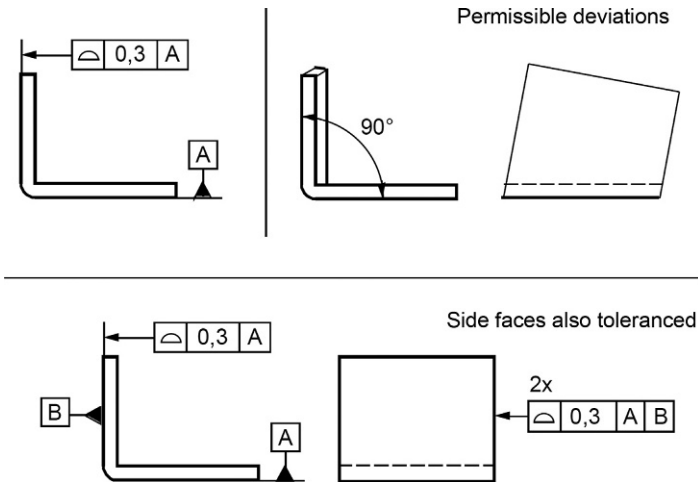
Tolerancing of perpendicularity of a sheet metal part
